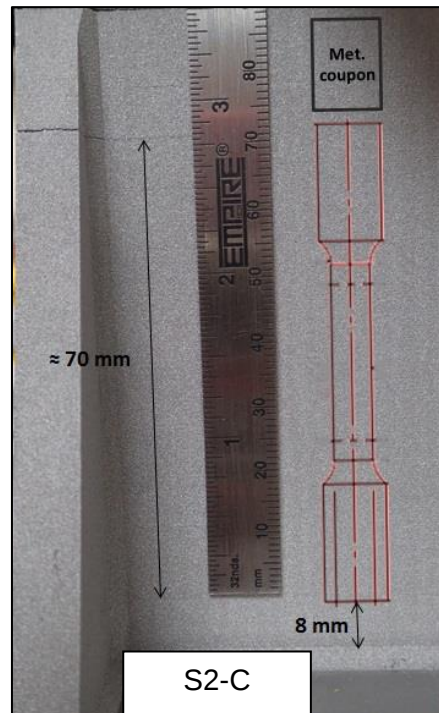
Layout for Electrical Discharge Machining (EDM) Cut of Mechanical Testing Specimens, per ASTM E8-09, Specimen 3
